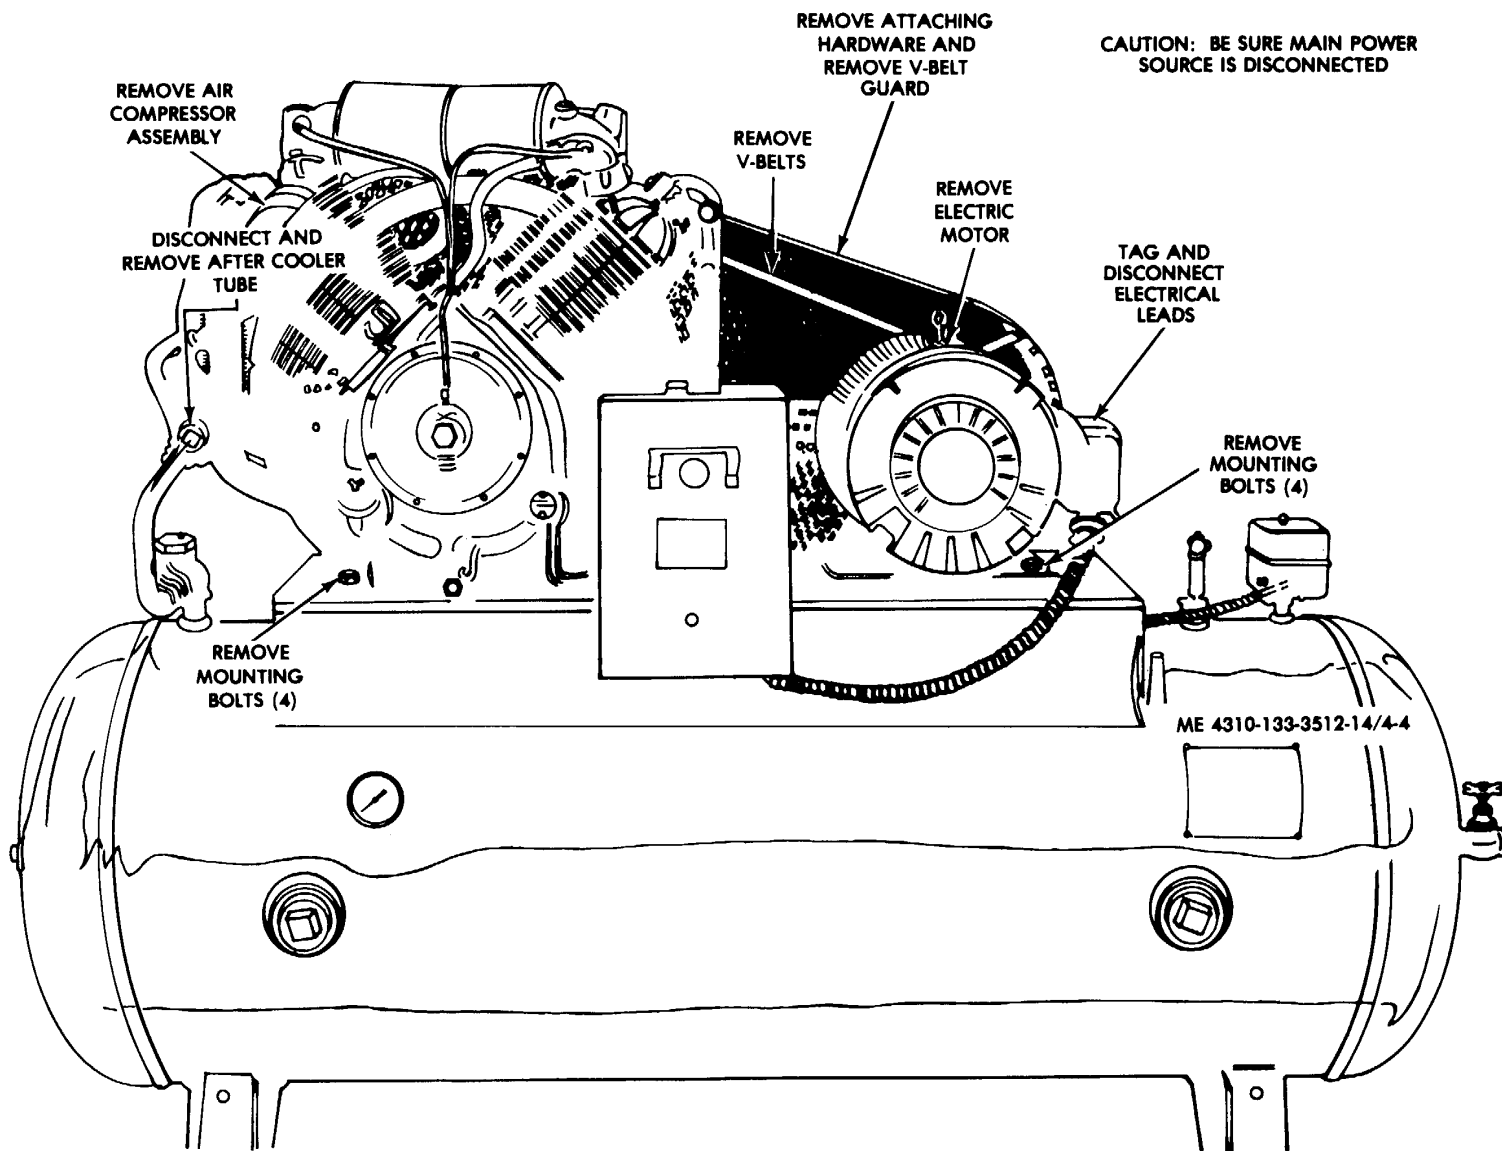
Electric Motor and Compressor Assembly, Removal and Installation.
